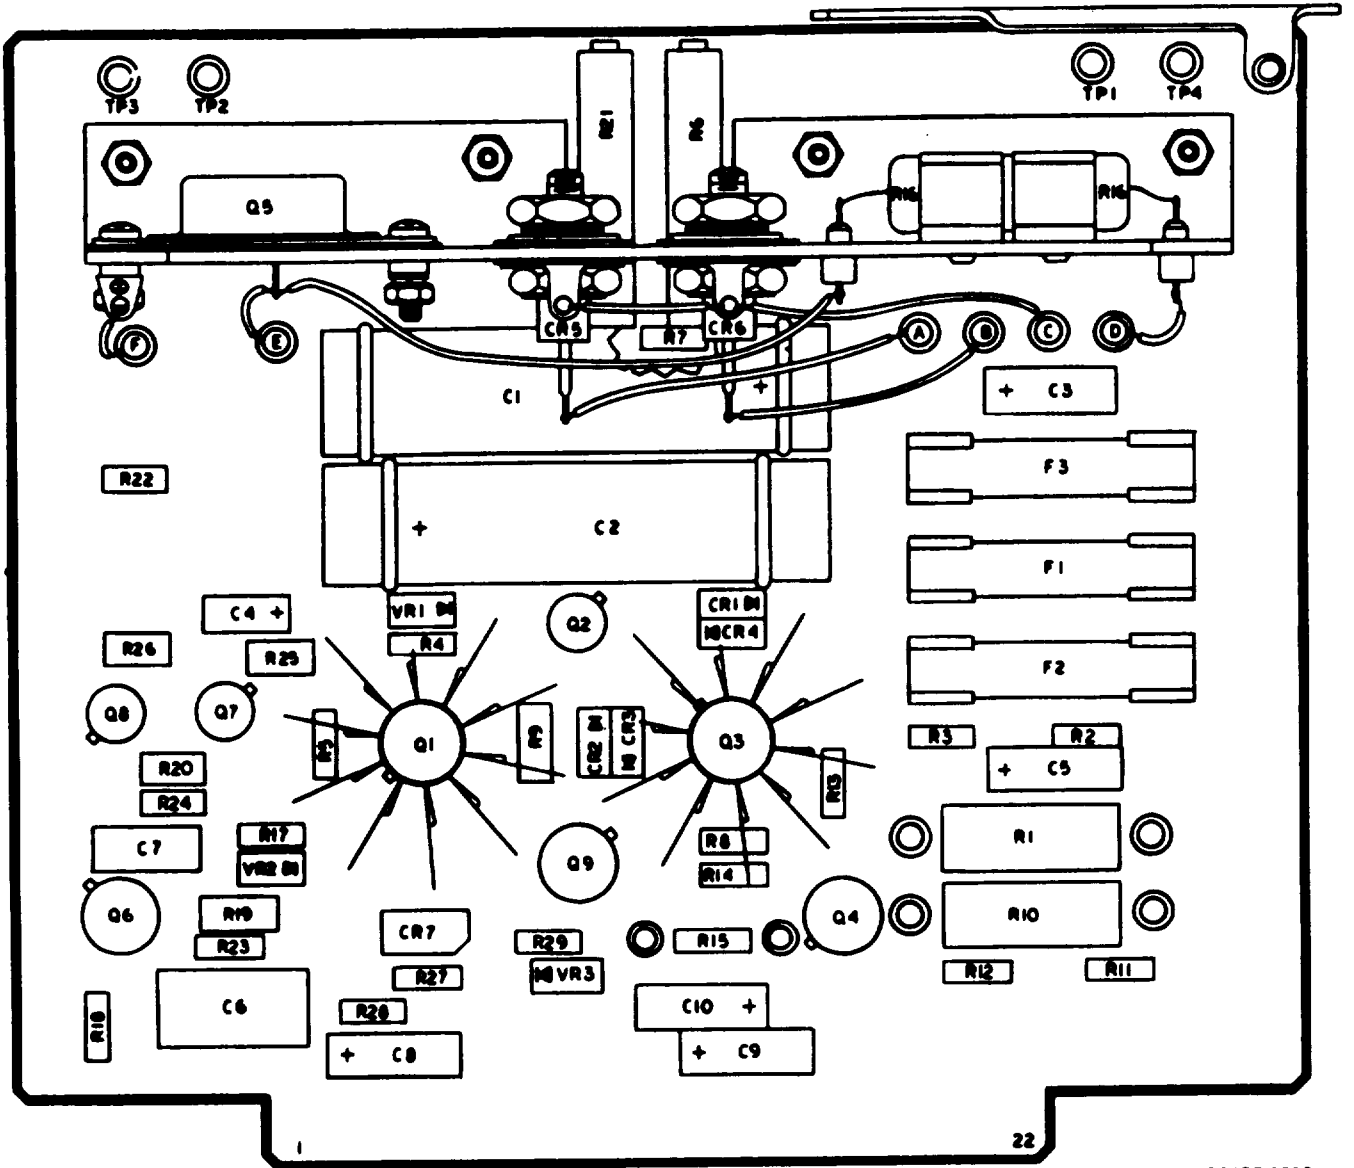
Component Locations - Power Supply Circuits, Assembly A2
